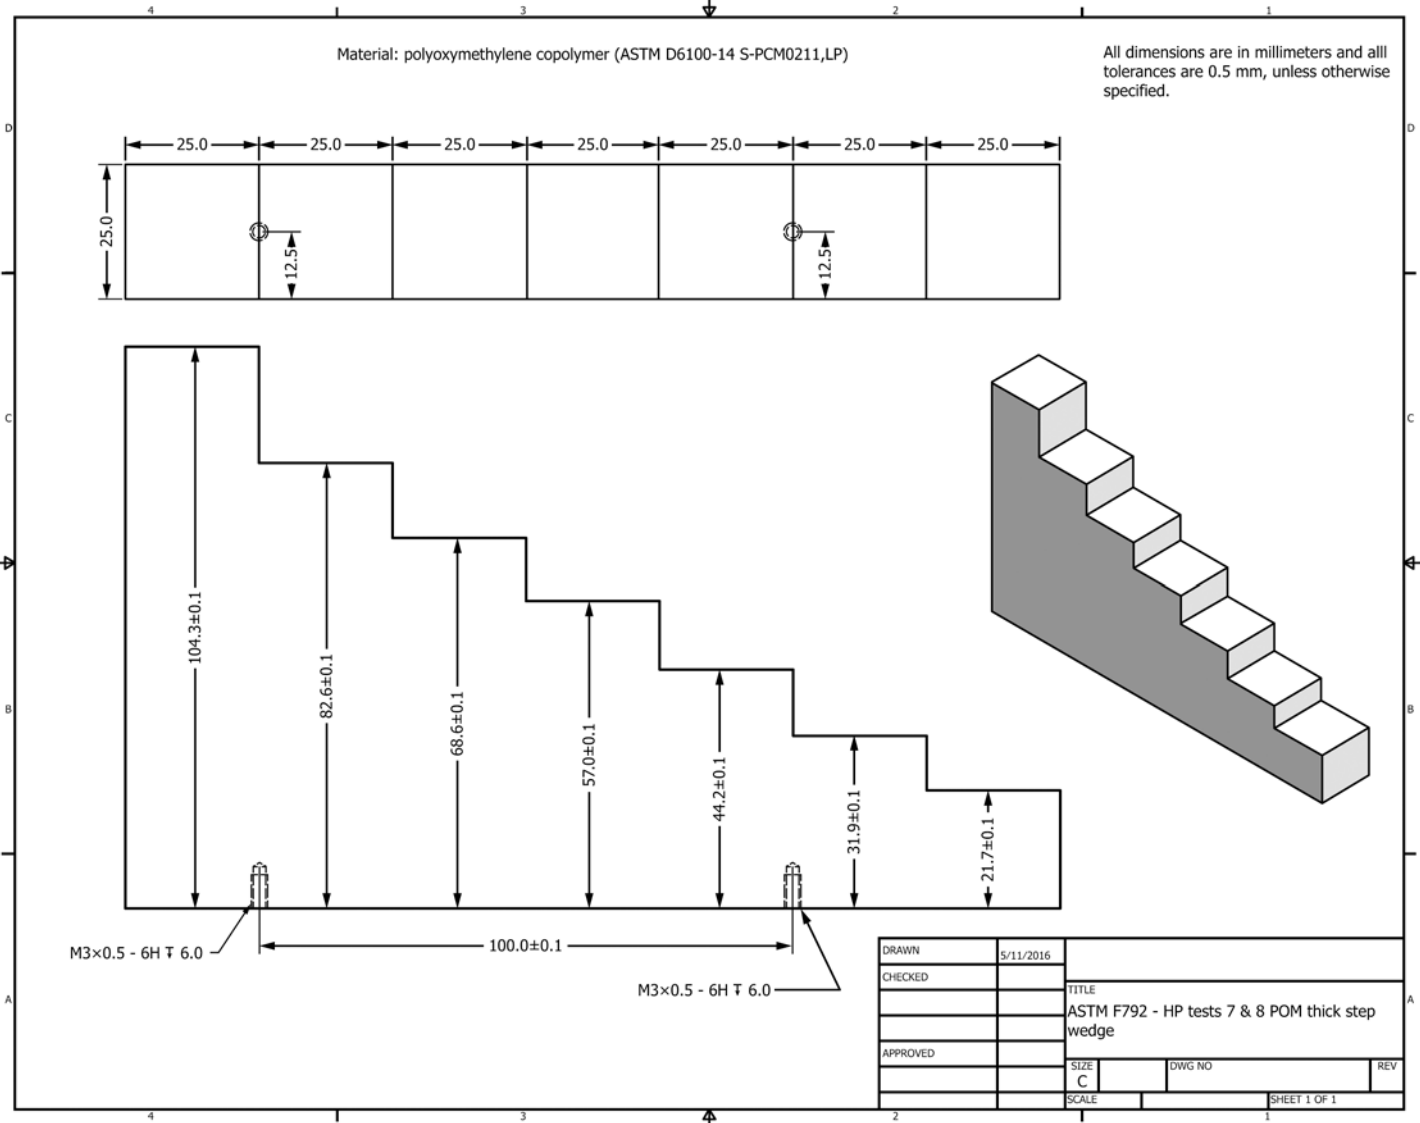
Practice F792 – HP Mechanical Drawing
